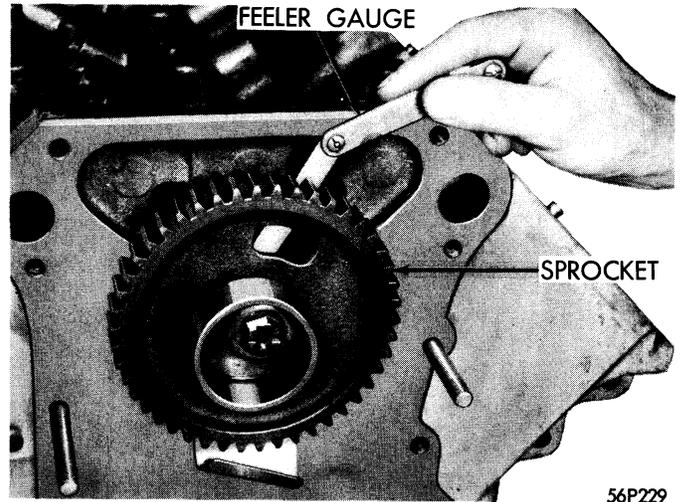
Measuring Camshaft End Play—V-8 Engine—277, 301 and 318 Cubic Inch Engine
